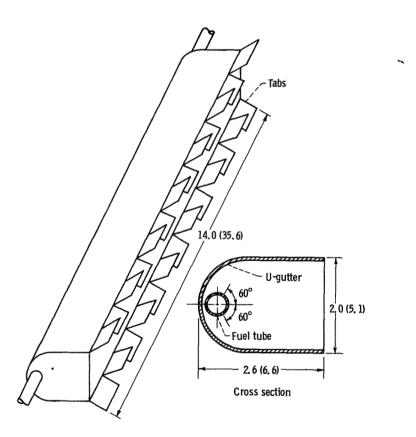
U-gutter flameholder and fuel tube. (Dimensions are in inches (cm).)
